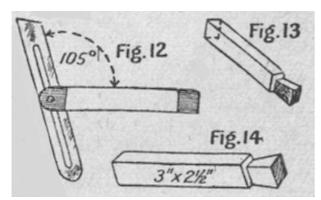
Joiner's adjustable bevel, set to 105°, for marking off splayed legs. Figs. 13 and 14. Two views of legs showing shoulder joints.
